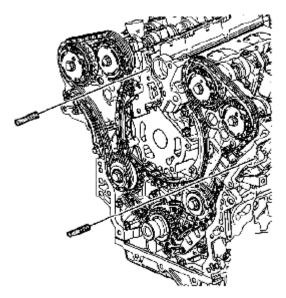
Identifying Special Tool EN 46105-2 Courtesy of SUZUKI OF AMERICA CORP.
